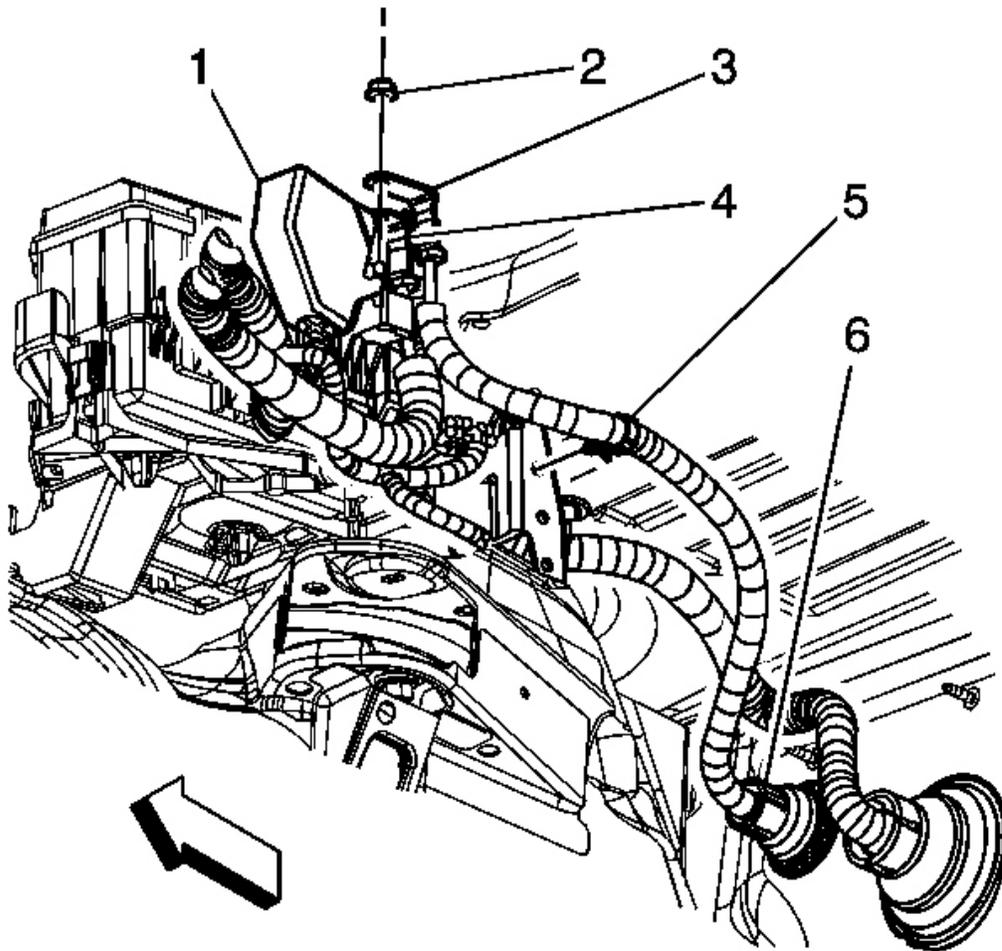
Identifying Battery Negative Cable Extension Cable Clip
